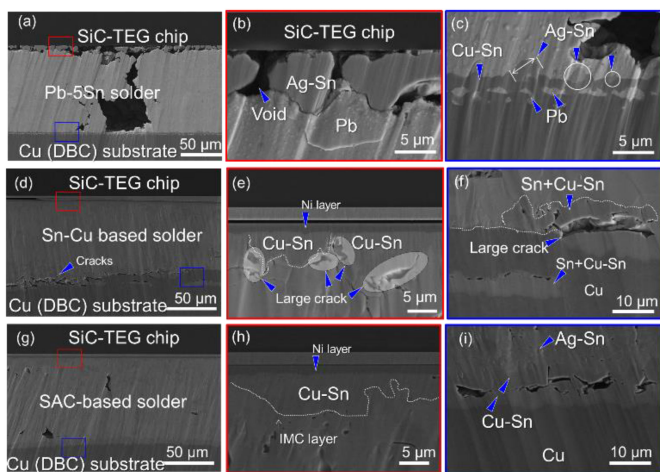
SEM cross section image of the (a) Pb-5Sn solder joint, (d) Sn-Cu based solder joint and (g) the SAC-based solder joint, (b), (e), and (h) the bonded interface between the SiC-TEG chip and solder materials, and (c), (f), and (i) the bonded interface between the solder materials and DBC substrate after power cycling test.
